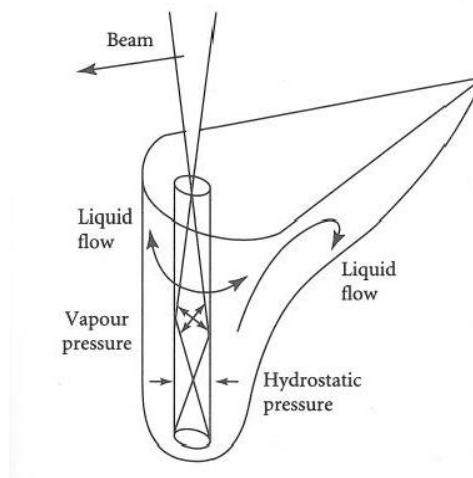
Principles of laser keyhole welding ⁶⁸
